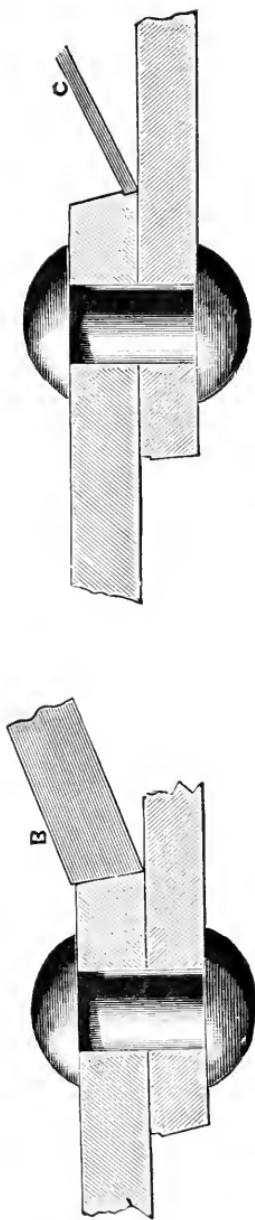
METHOD OF CAULKING JOINTS OF PLATES IN BOILERS.
